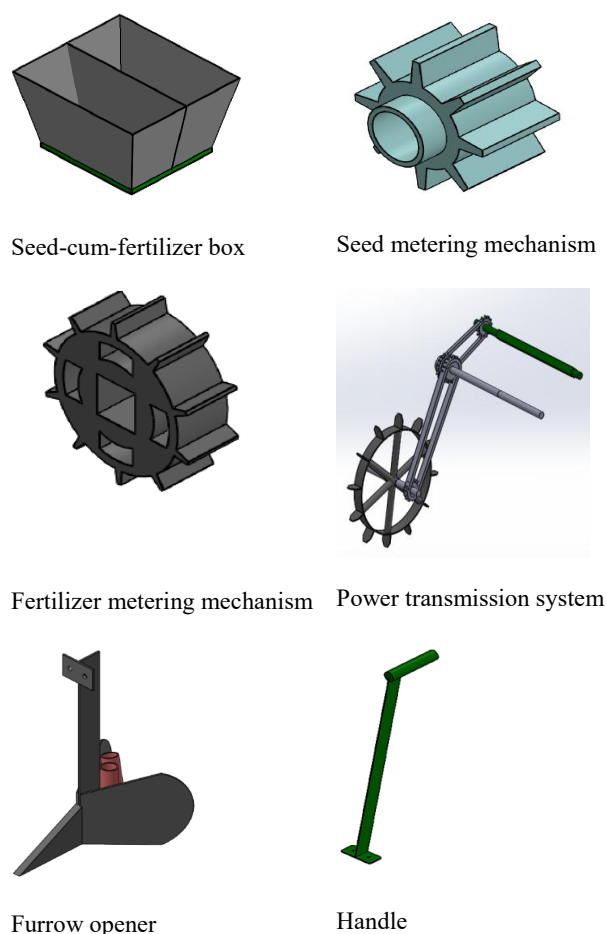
Isometric view of different components of the developed seed-cum-fertilizer drill
